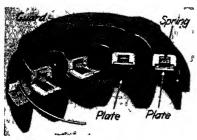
Valve using coiled plate springs. (Courtesy of Pennsylvania Pump & Compressor Co.)
